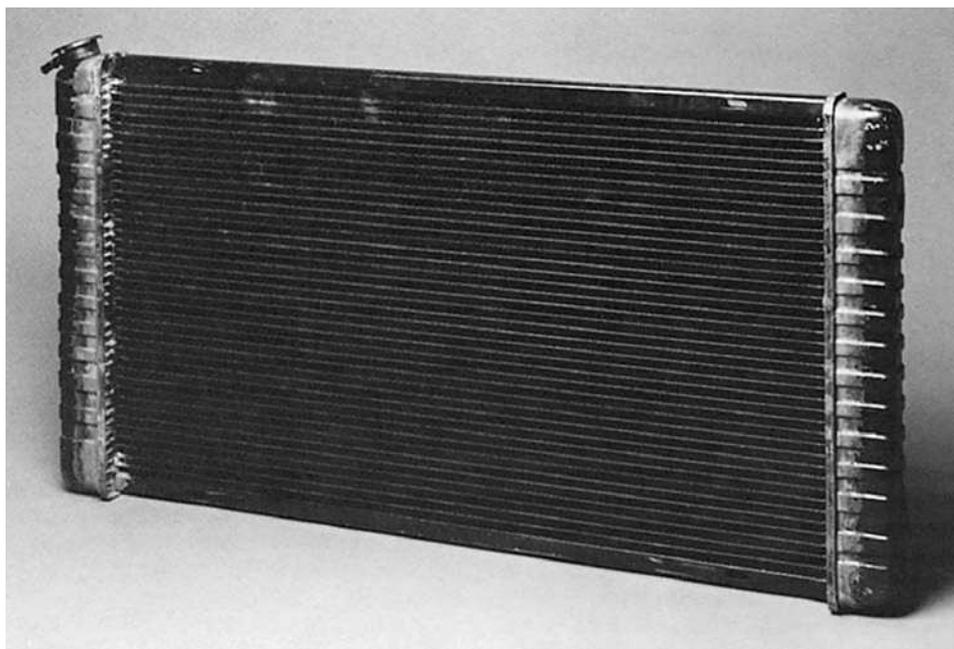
Automotive radiator fabricated from several formed copper alloy components, including a deep-drawn water tank, roll-formed cooling tubes, and formed cooling fins
